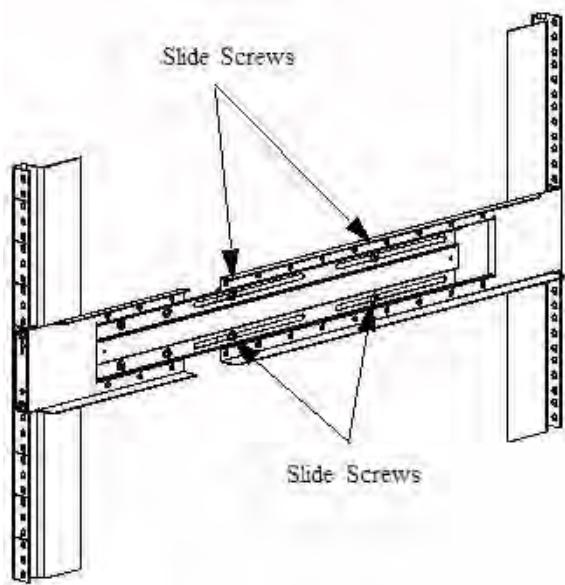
Tightening the Screws on the Rail's Slider Mechanism
